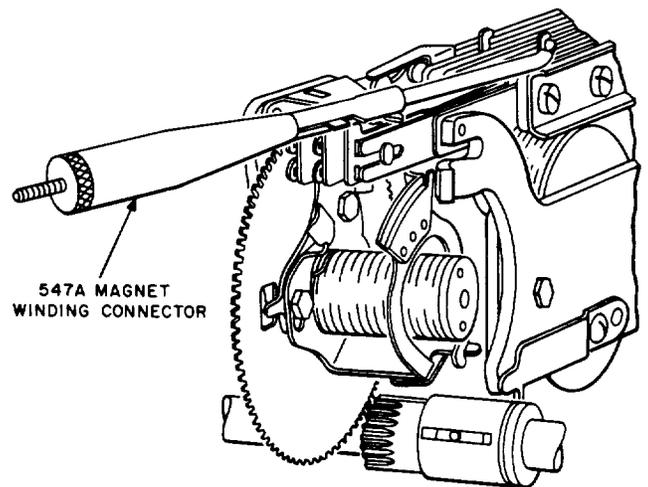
Connecting to Winding Terminal of a 1-Type Timer
